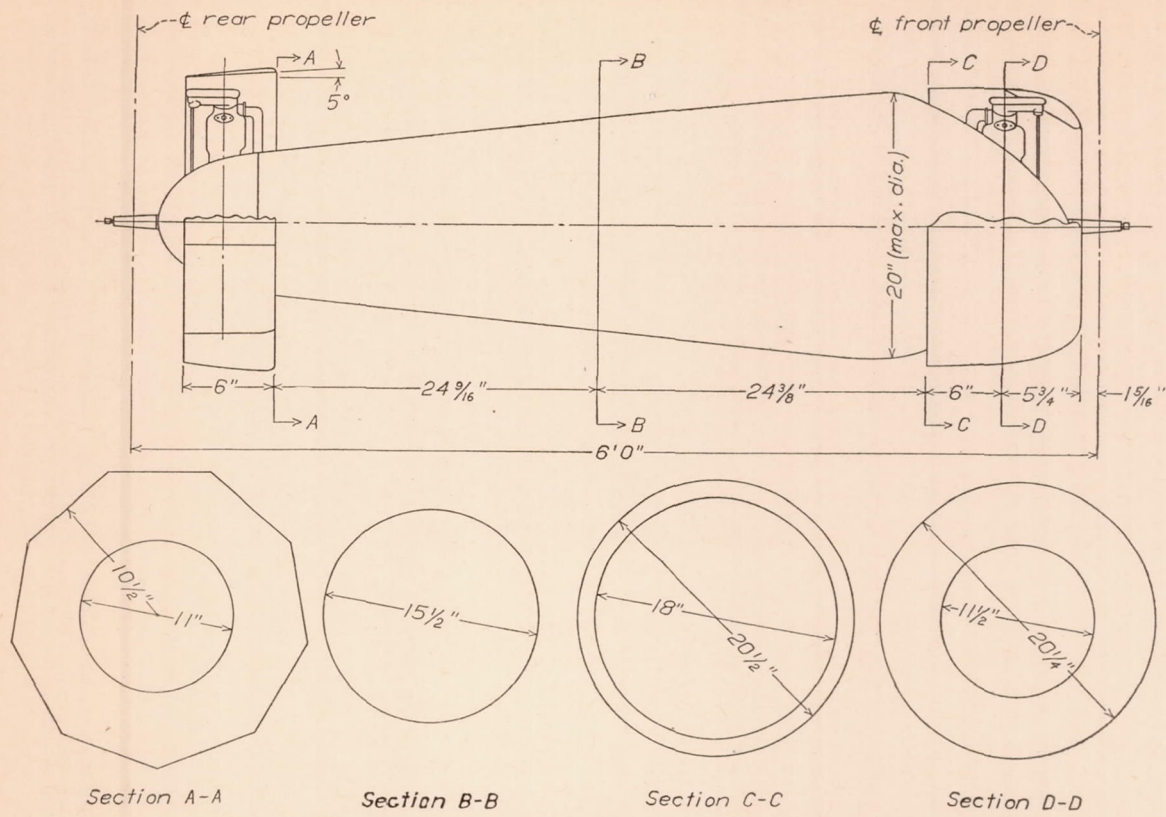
Large nacelle and engine assembly, propeller spacing 1 1/2 diameters.
